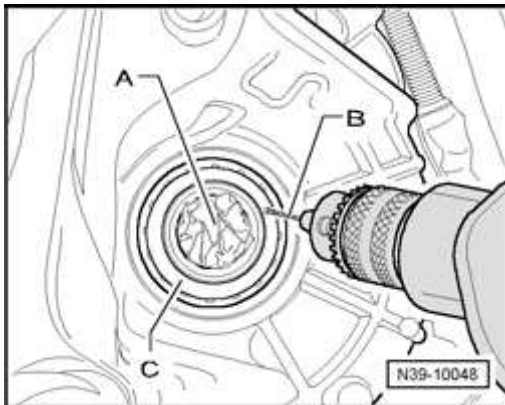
Drilling Hole Into Outer Metal Ring Of Drive Axle Sealing Ring Drive Axle And Identifying Cloth In Seal Opening
